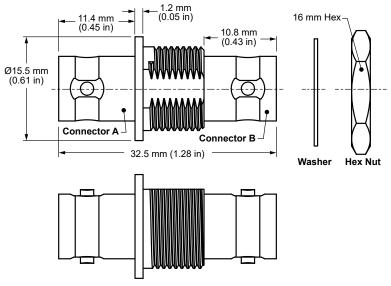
Product Dimensions for the ADP-BNCF-BNCF-B Adapter
